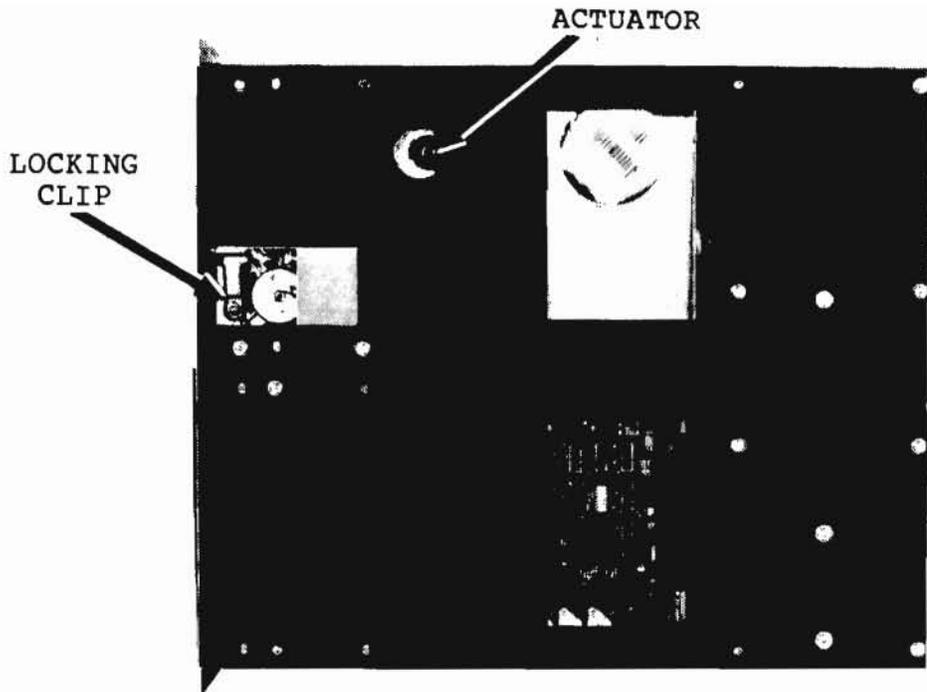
ACS8000-12, ACS8000-14 with Bottom Plate Removed and Locking clip in Operating Position.
